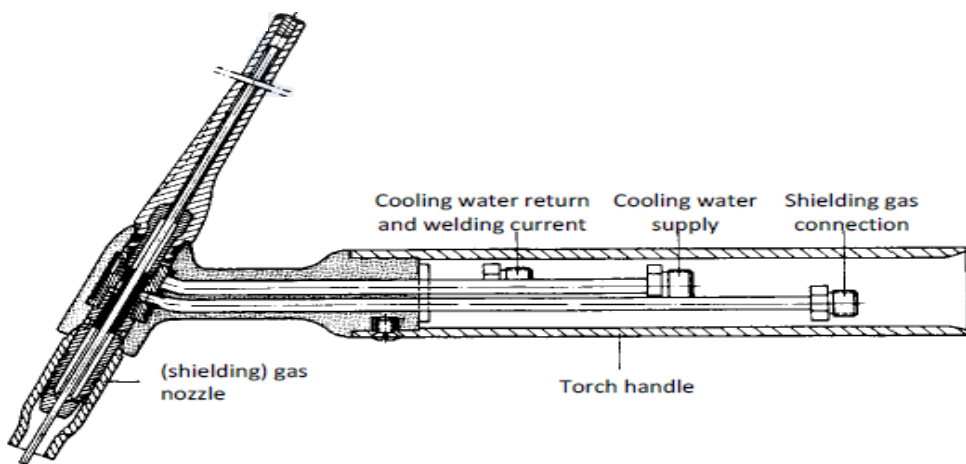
Sectional view for Water-cooled GTAW welding torch
